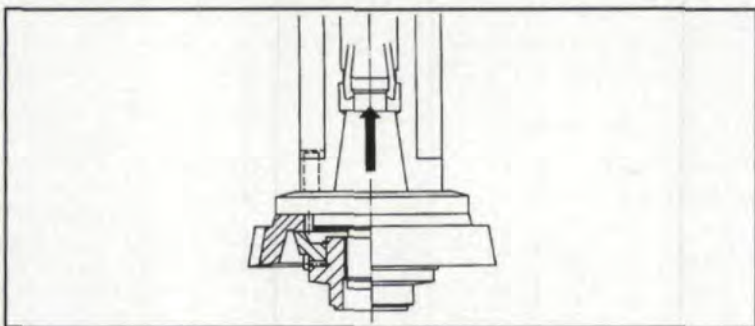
Automatic cutter clamping feature. The cutter and adapter are hydro-mechanically clamped into the cutter spindle.
